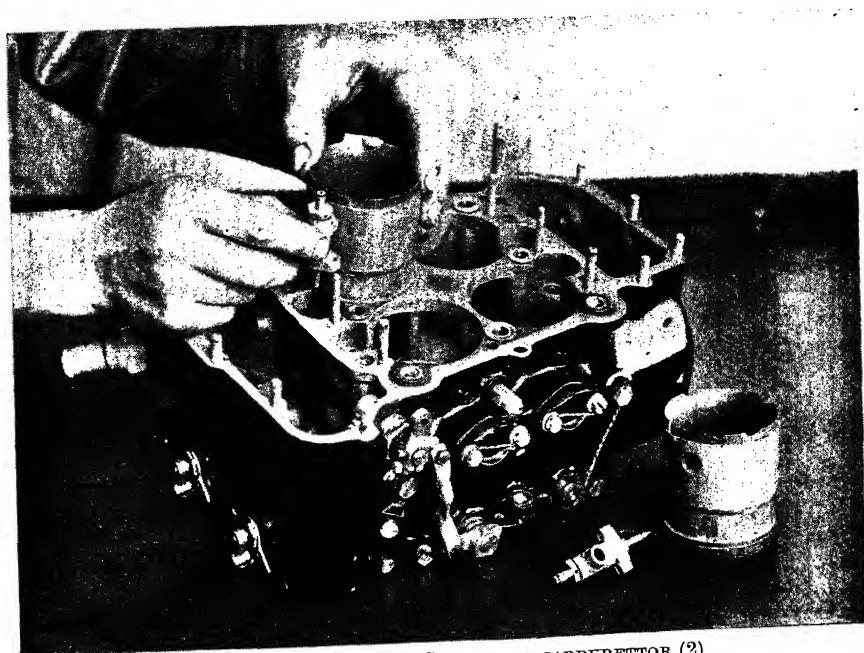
B.—SERVICING A STROMBERG CARBURETTOR (2)
